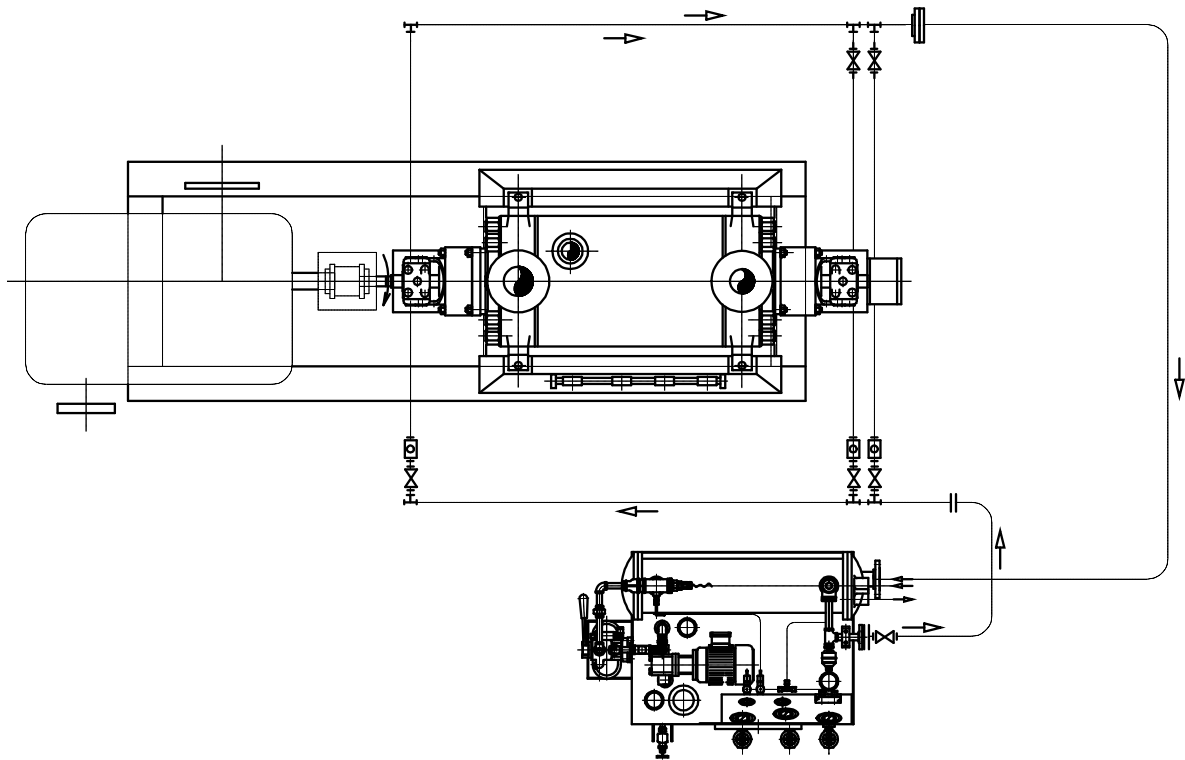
Lube oil system at the side of the pump for pump bearings lubrication only
